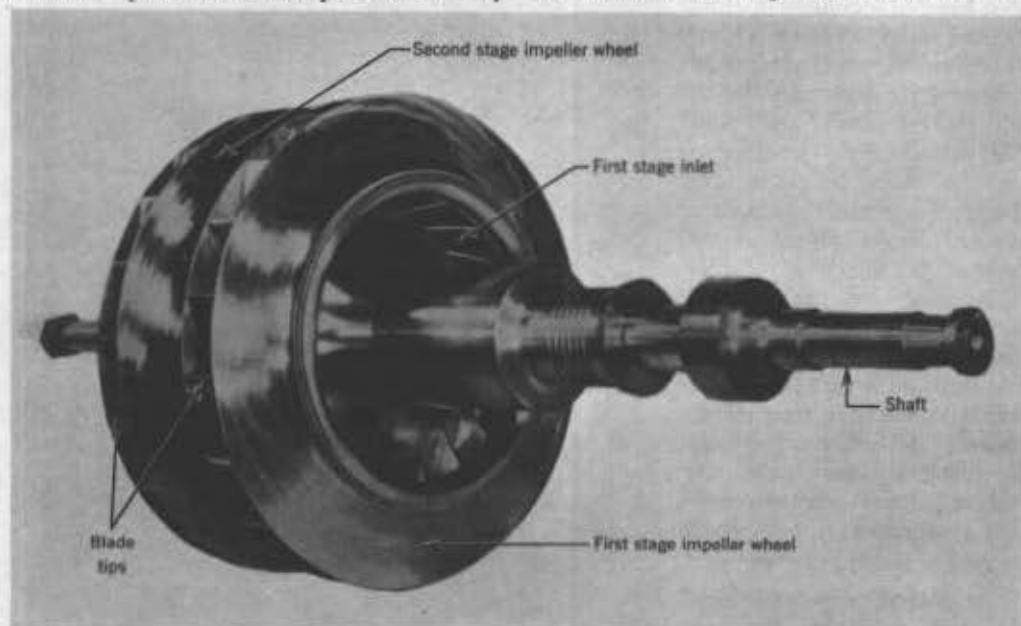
Two-stage rotor centrifugal compressor rotor assembly. (Courtesy York Corporation.)
